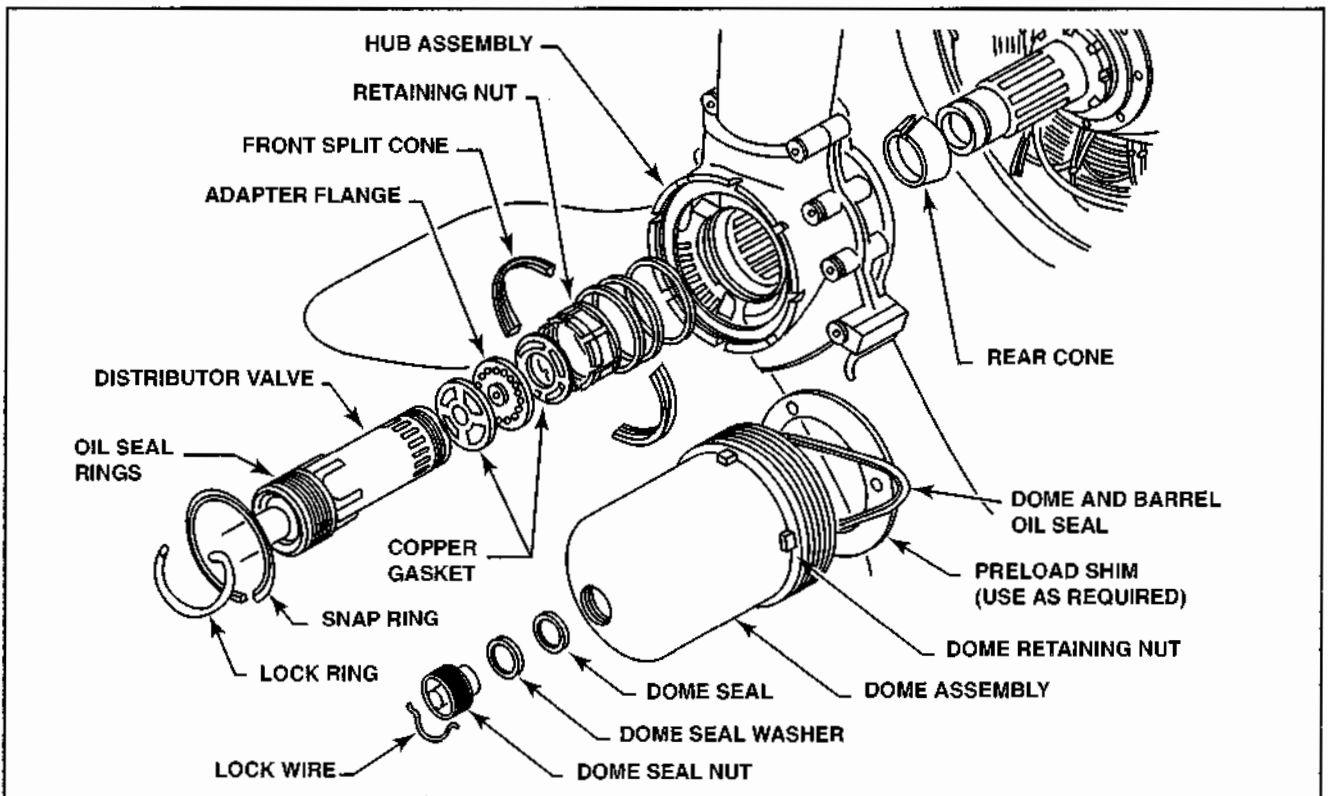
A Hamilton Standard Hydromatic propeller is made up of three major assemblies: the hub assembly, the dome assembly, and the distributor valve.
